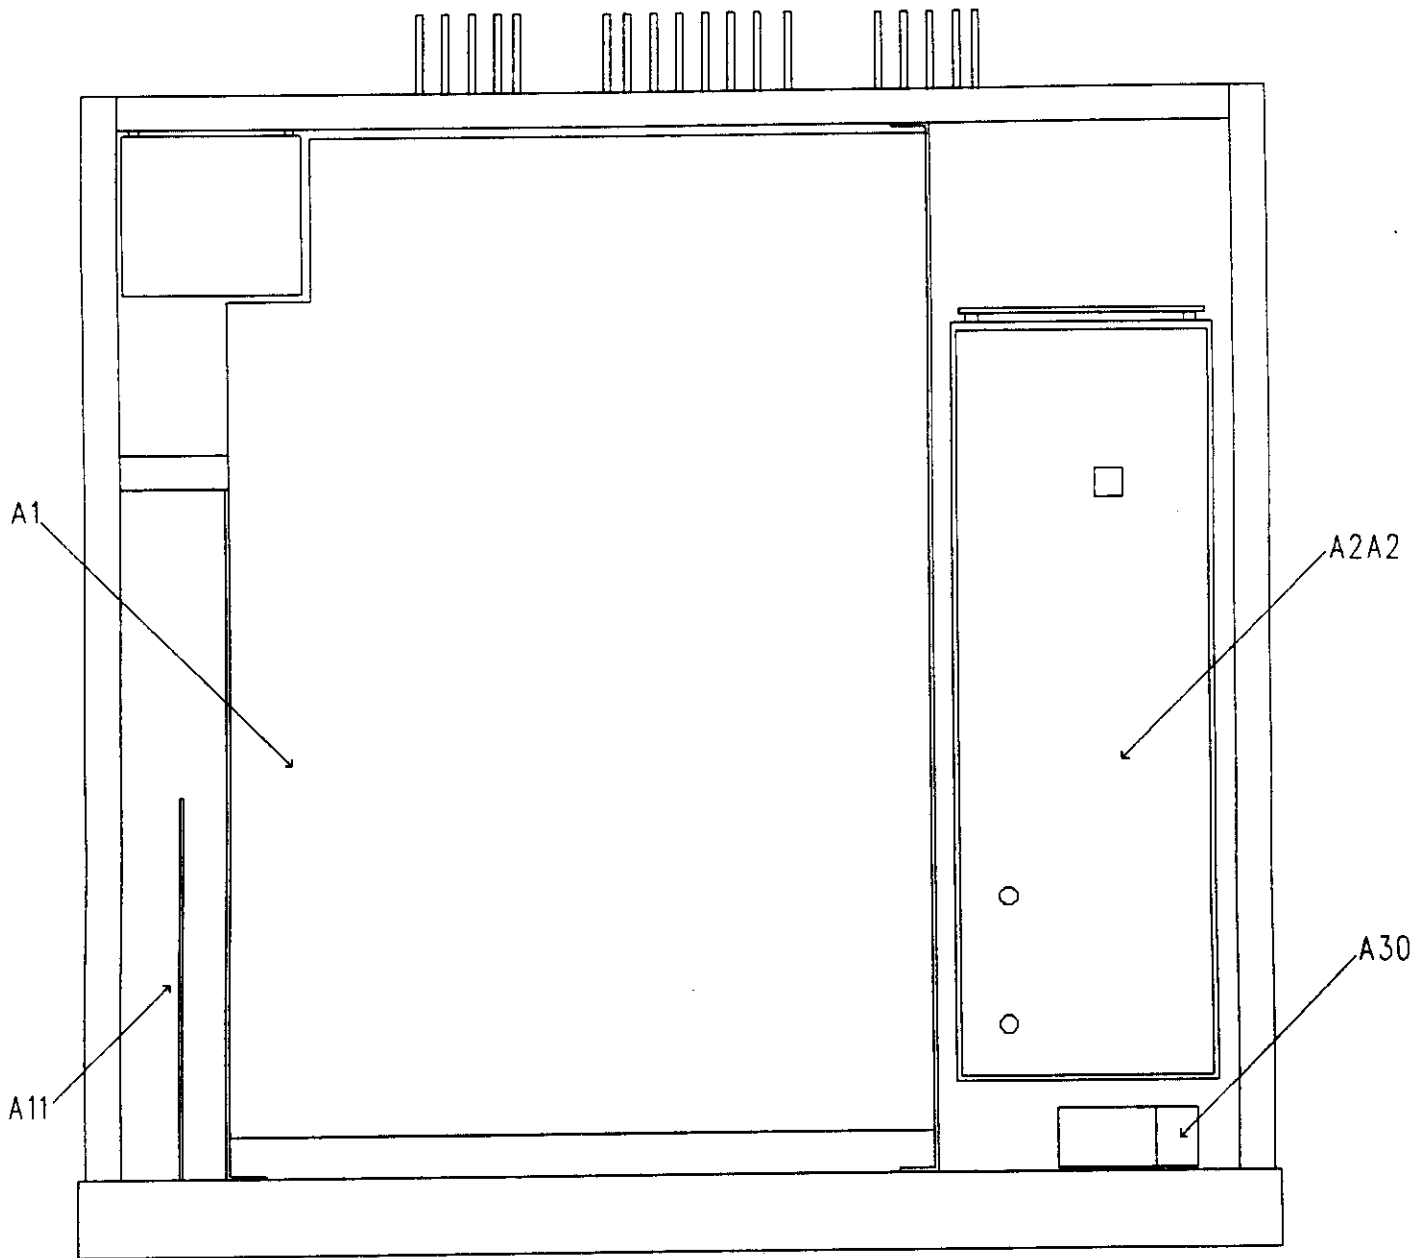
MAJOR ASSEMBLY LOCATION, TOP VIEW.
